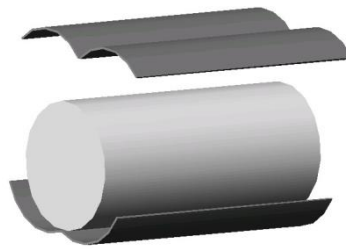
E modulus tests specimen and mould apparatus (Meneghini, 2014).
